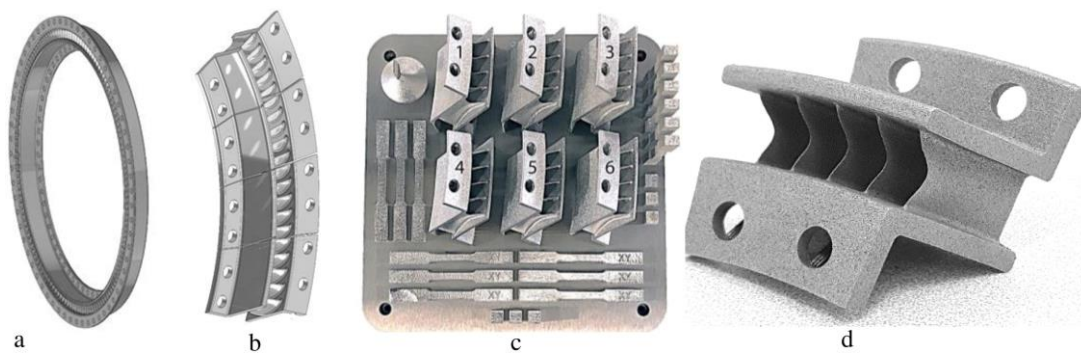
(a) OGV; (b) Four segments; (c) Printed segments on build plate; (d) Printed segment
